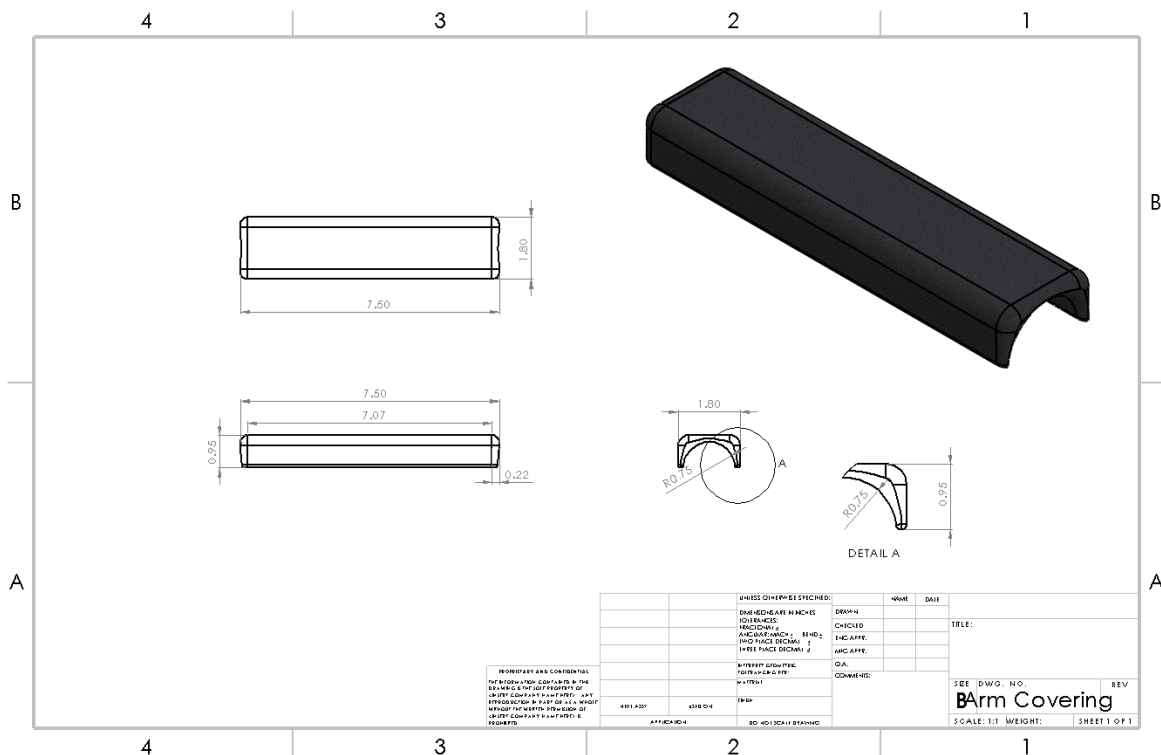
The sketch and dimensions of the arm covering of the handlebars.
